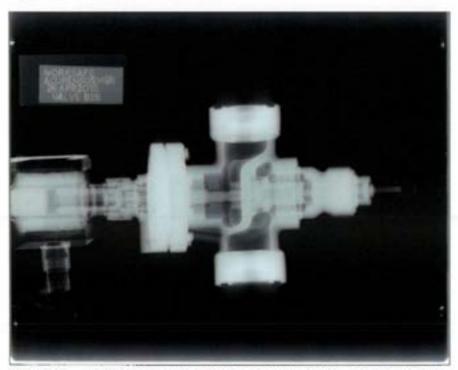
Radiographic view of solenoid valve B-26 showing closed position with stem backed out.
